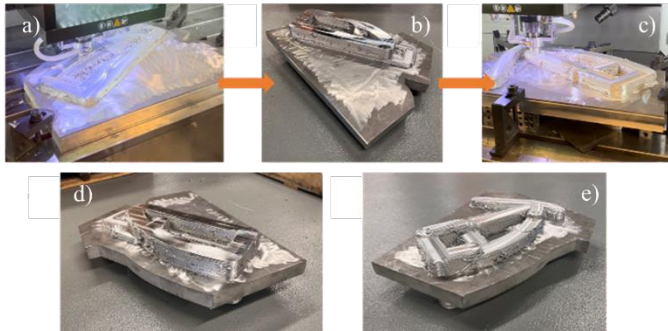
a) Deposition of the top side preform, b) facing the top side preform to provide a flat, 50.8 mm-tall surface for support during bottom side deposition, c) deposition of the bottom side, d) completed top side preform, and e) completed bottom side preform.
